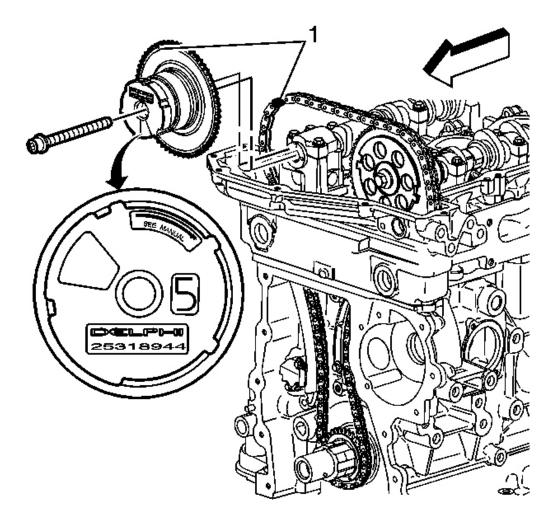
Installing Exhaust Camshaft Actuator Into The Timing Chain Courtesy of GENERAL MOTORS CORP.
